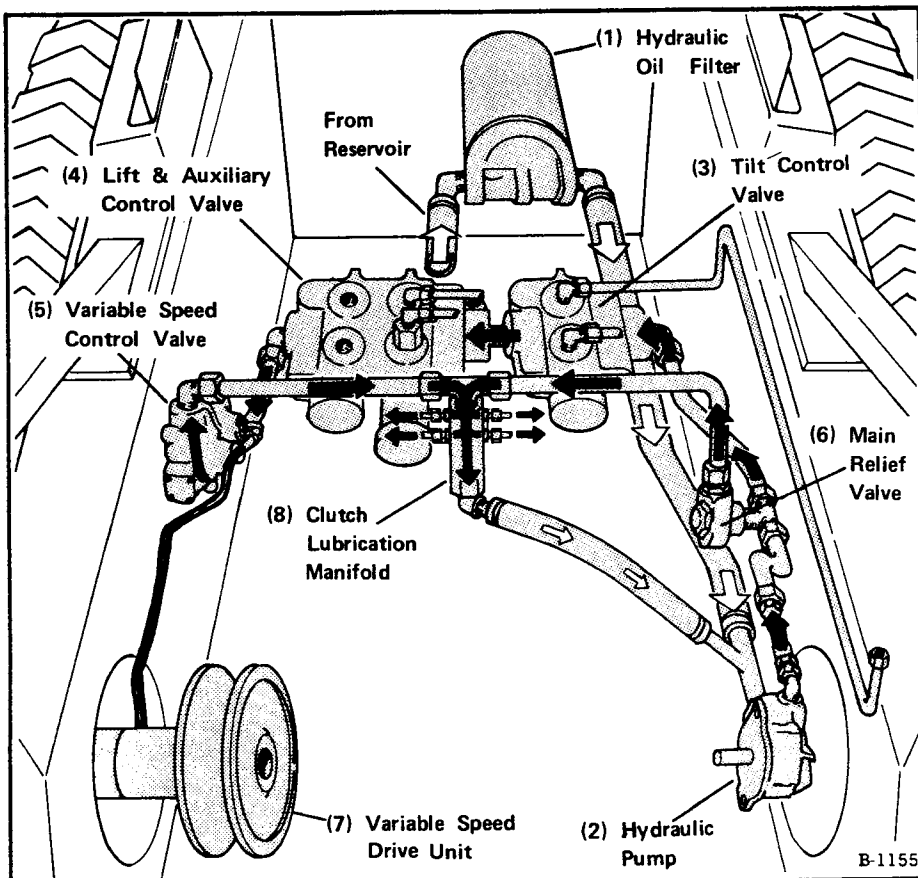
Hydraulic System (M-500 & M-444 Gasoline & LP Gas)
